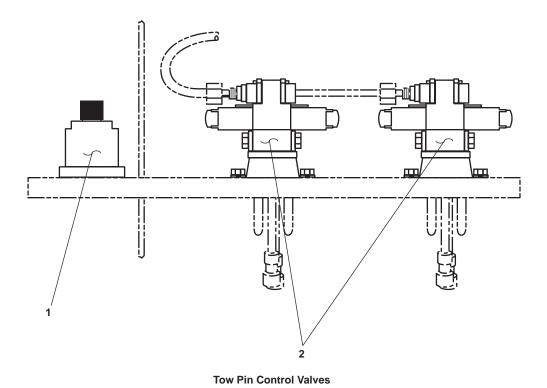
Deck Machinery and Hydraulic Systems (Sheet 1 of 2)
